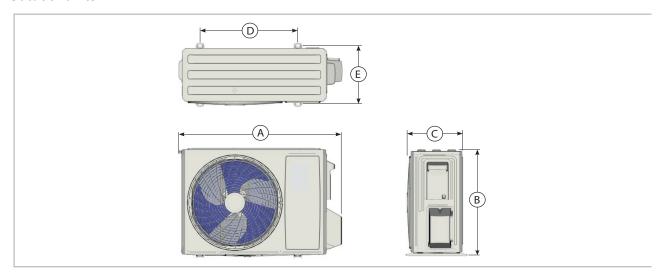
Outdoor unit dimensions BL 264-354 DC AT
